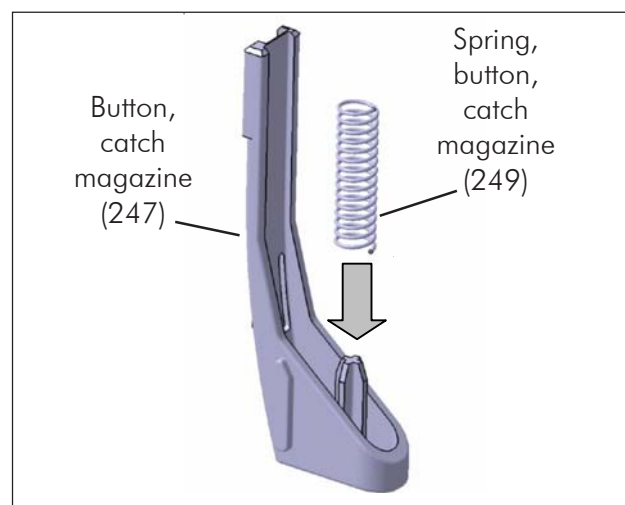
f - Reassembly of the spring, button, catch magazine (249)
